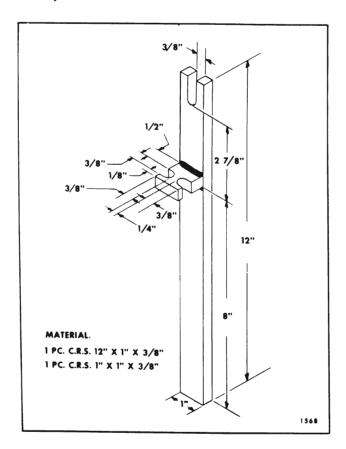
Rear Compartment Torque Rod Adjusting Tool
